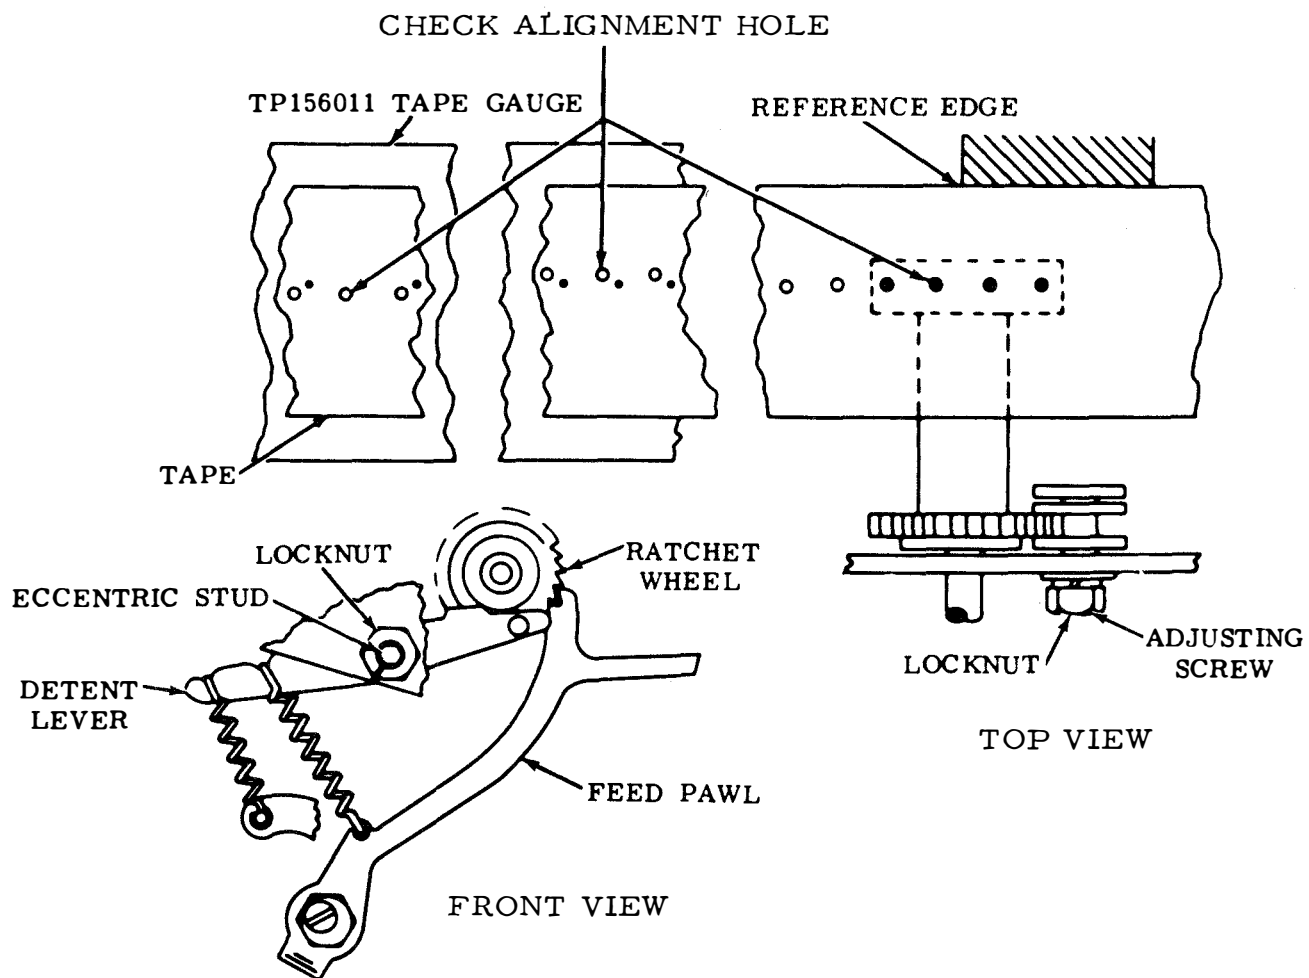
Lateral and Front-to-Rear Wheel Position Detent, Early Design
